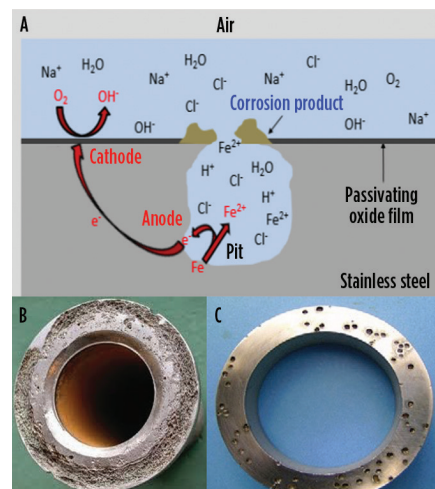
Crevice and pitting corrosion mechanism (A), crevice corrosion appearance in stainless steel (B), pitting corrosion appearance in stainless steel (C).
